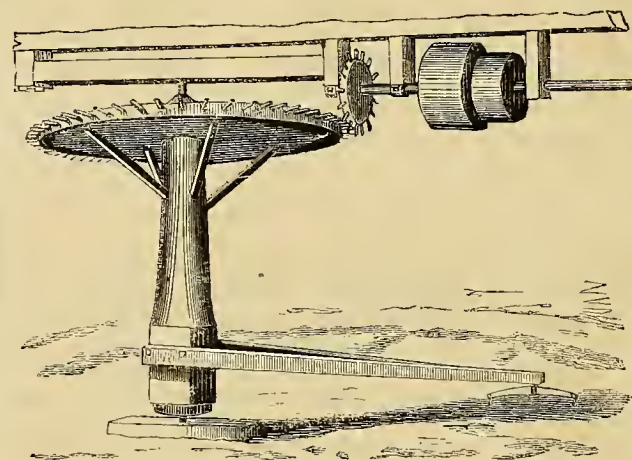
SWEEP HORSE-POWER WITH PIN-GEARING.
